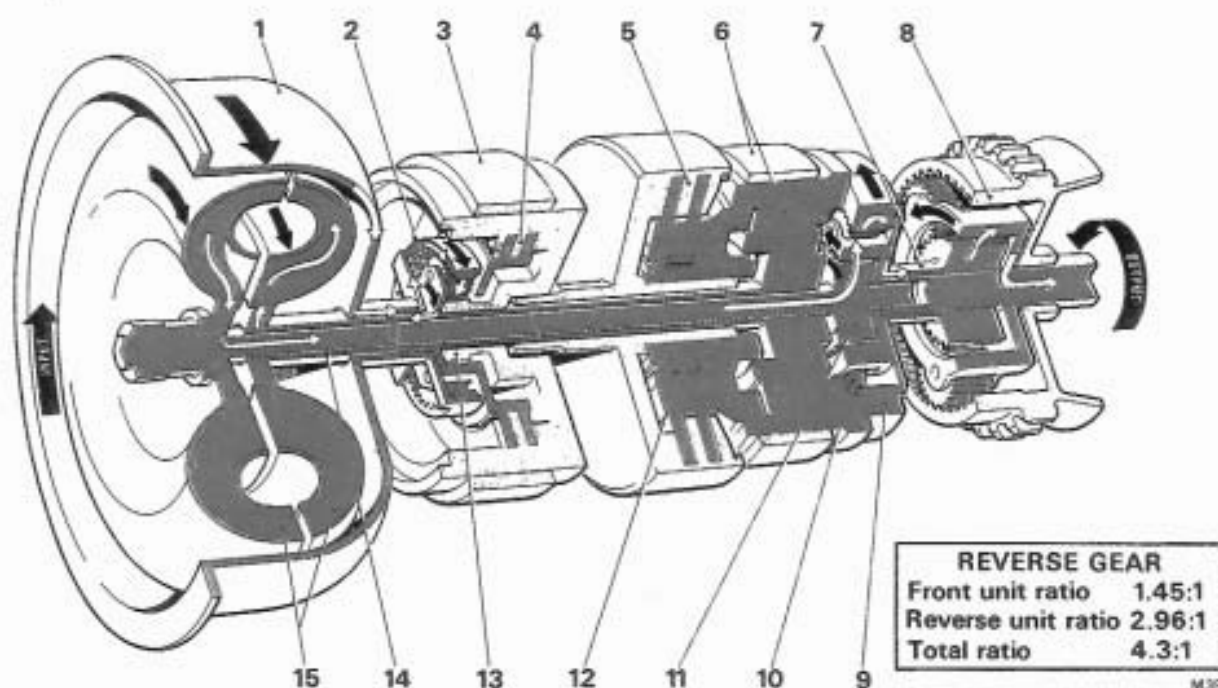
LINE OF DRIVE IN REVERSE GEAR
